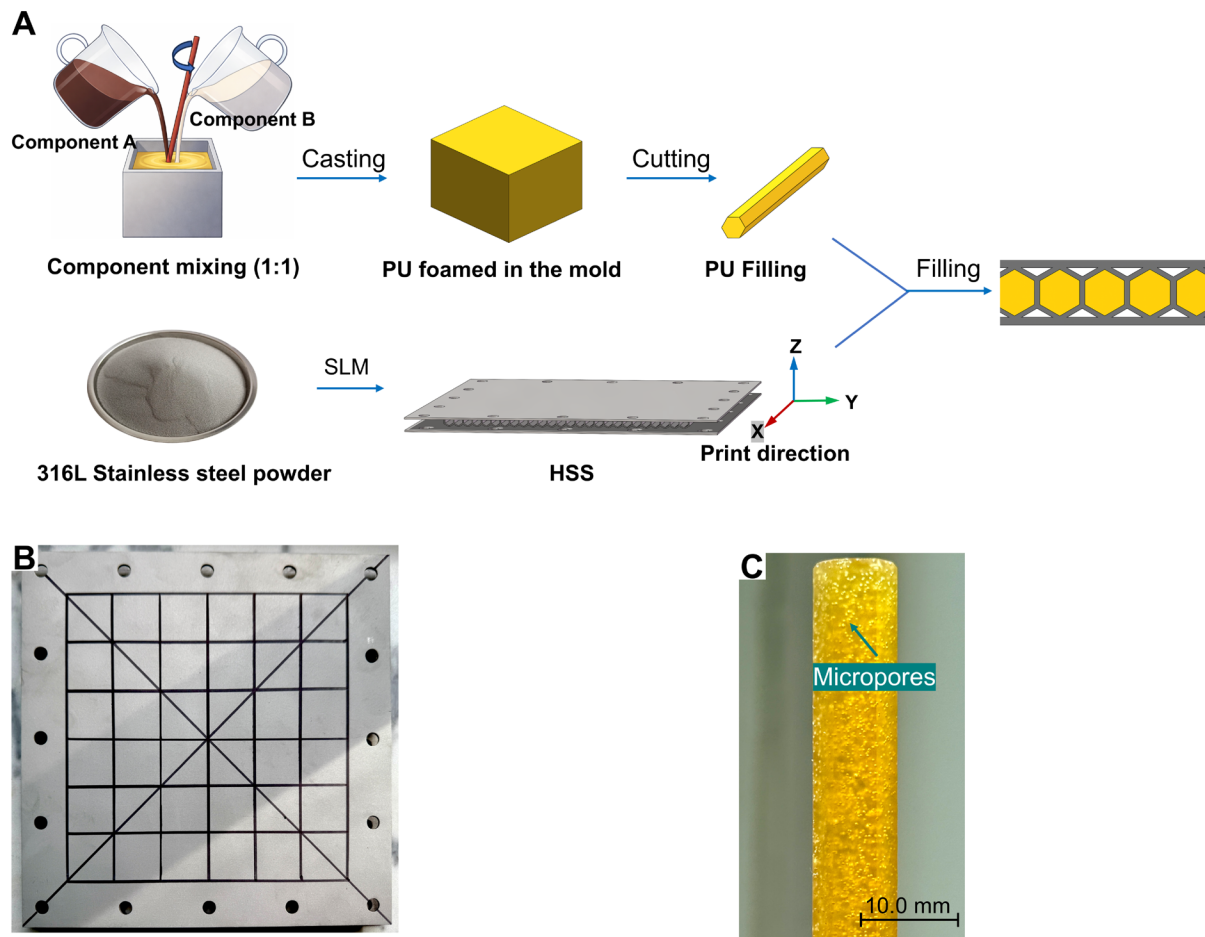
Fabrication procedure: (A) Schematic illustration of the fabrication procedure; (B) SLM-fabricated 316L stainless steel honeycomb structure; and (C) optical image of the PU specimen
